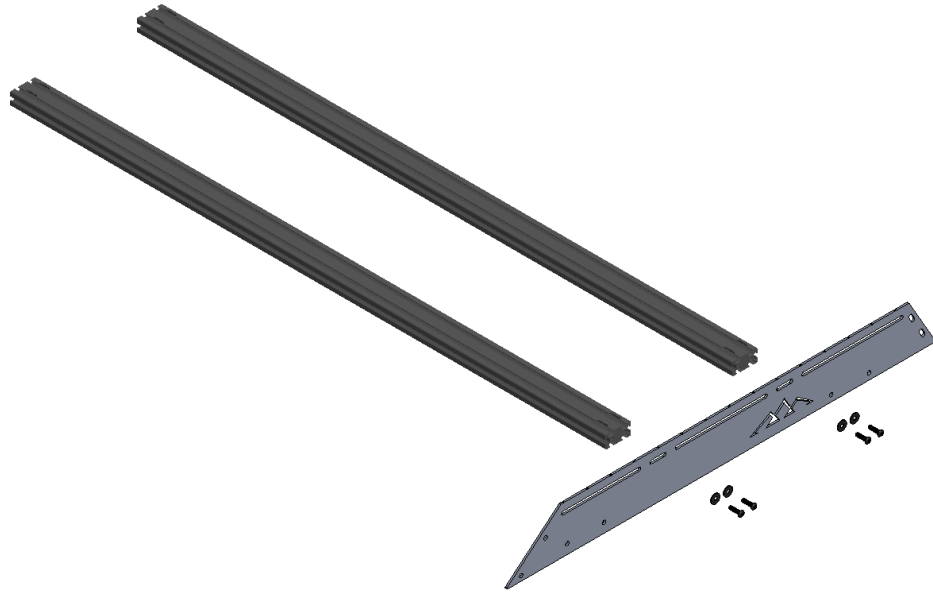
Assembly of half rack subassembly; crossbars and driver side panel
